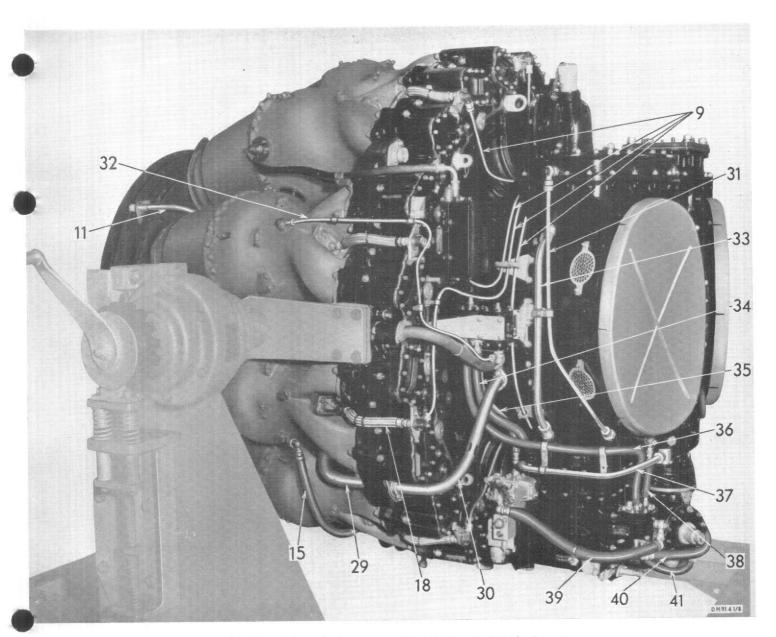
Disposition of pipes on starboard side of 48 Mk. 1 engine.
